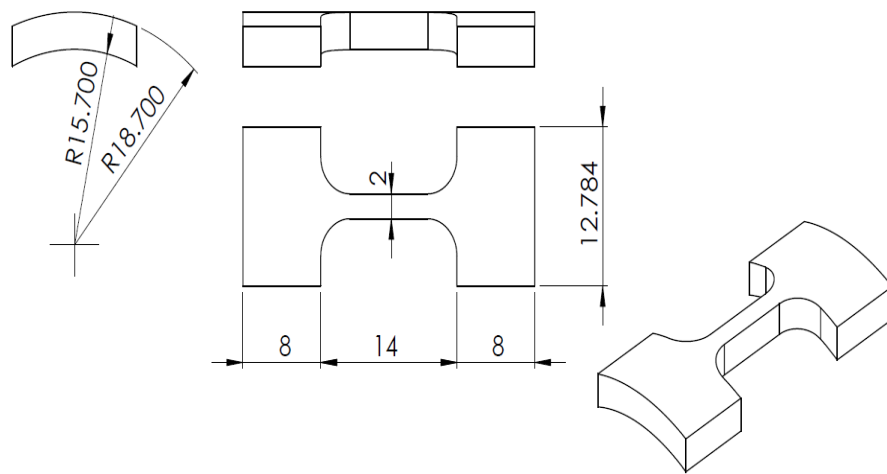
Microtensile specimen geometry; the curved surface requires support during clamping and testing.
